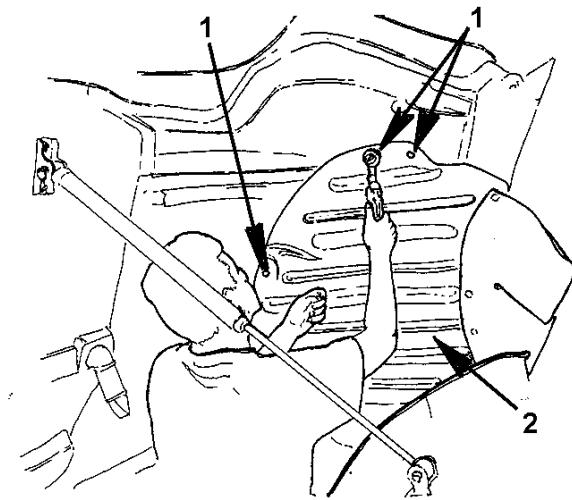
Splash Panel Remove/Install (Passenger Side Shown)
